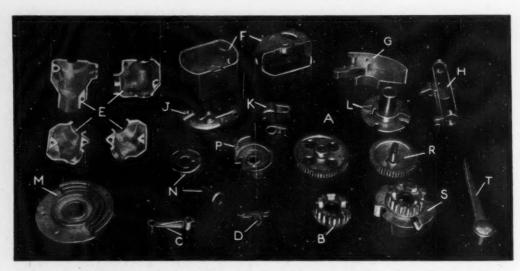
Examples of Zinc Pressure Die Castings for Necchi Sewing Machines. The New Foundry has an Output of 15 tons of Zinc Castings per Month, all for Sewing Machines
